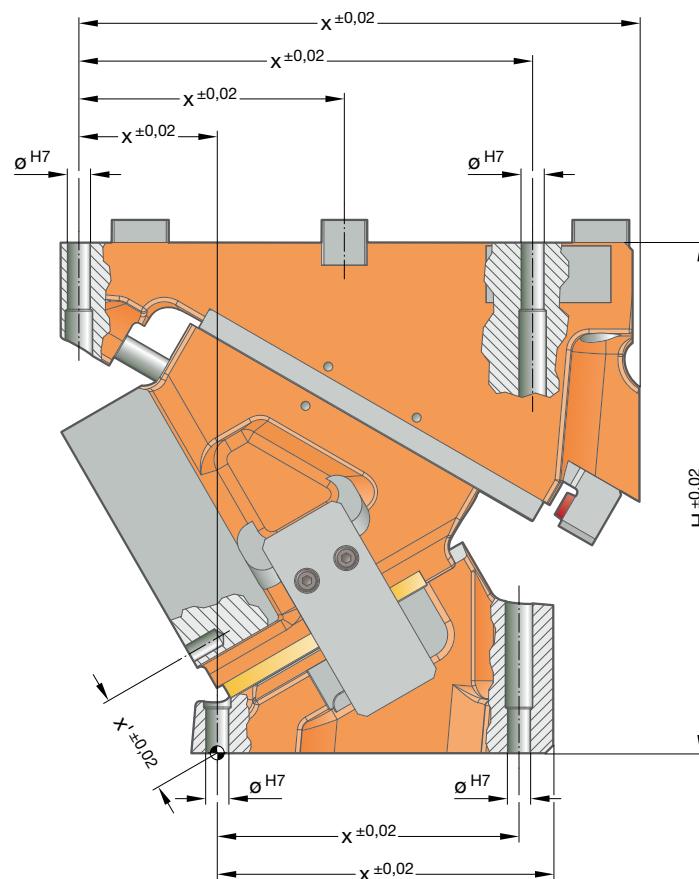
Tolerances of aerial cam units with EFP equipment
